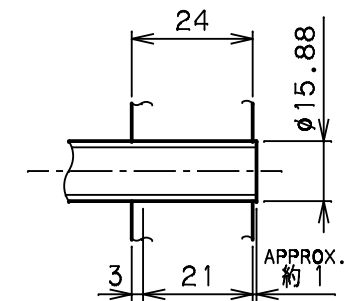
DETAIL OF "TUBE SIDE" NOZZLE (VIEW A-A)
